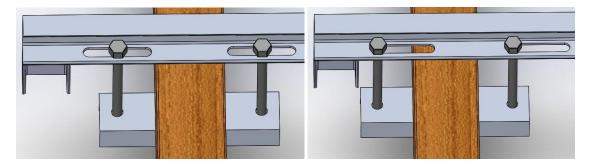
Adjustable Positioning of the Support Beams (3D CAD Model)
